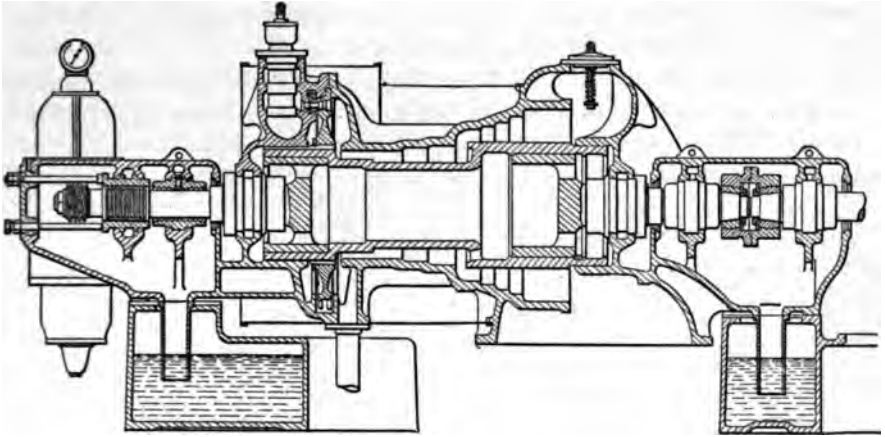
Brown, Boverie & Co. composite-type turbine.
